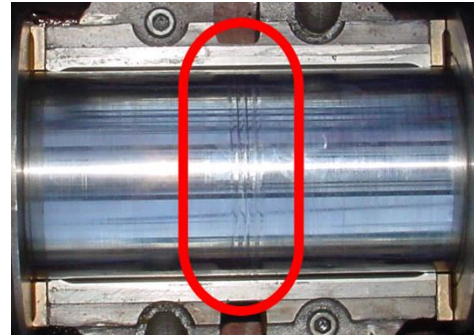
Shaft damage due to contaminants in the oil rings.
